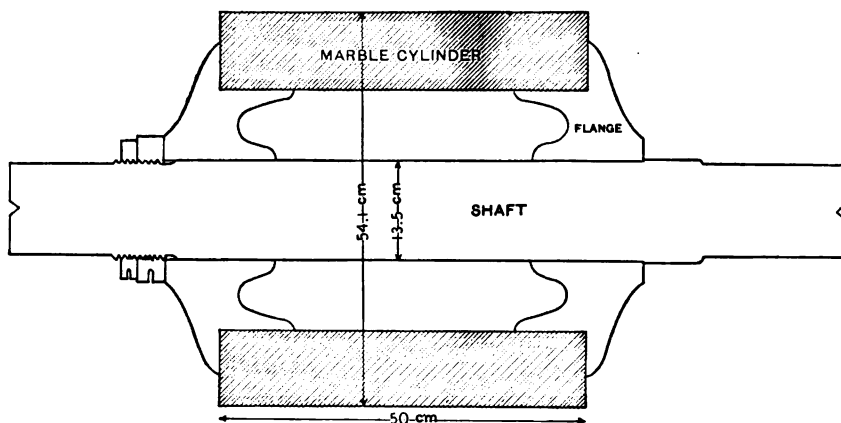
Section of Shaft and Marble Cylinder Mounted.
